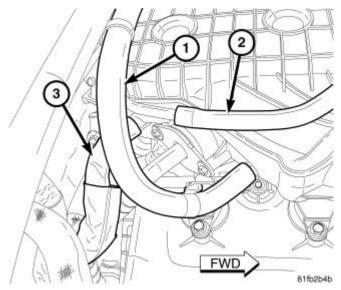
EGR Tube, PCV & Power Brake Booster Vacuum Hoses Courtesy of CHRYSLER LLC
